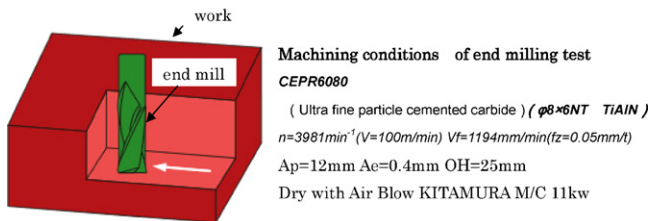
Detail conditions of end milling test and schematic drawing of machining test.
